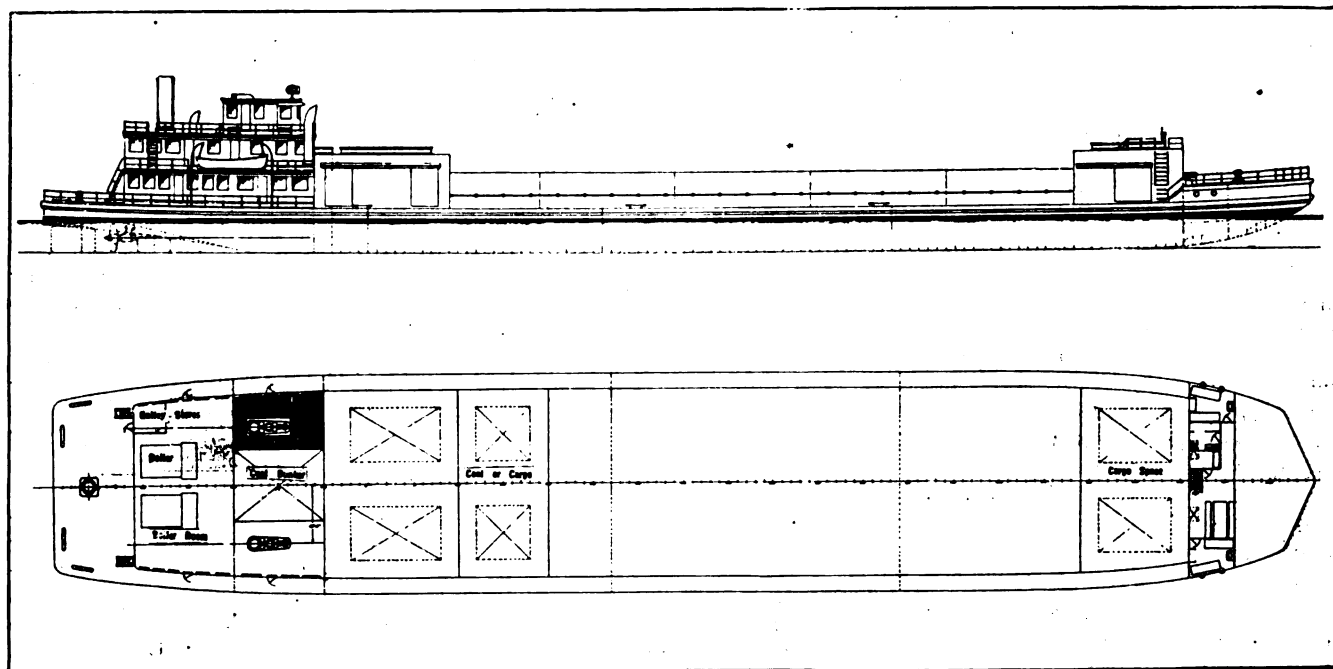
DECK AND SIDE ELEVATION OF STEEL TUNNEL-STERN SELF-PROPELLED BARGE FOR USE ON SOUTHERN RIVERS
